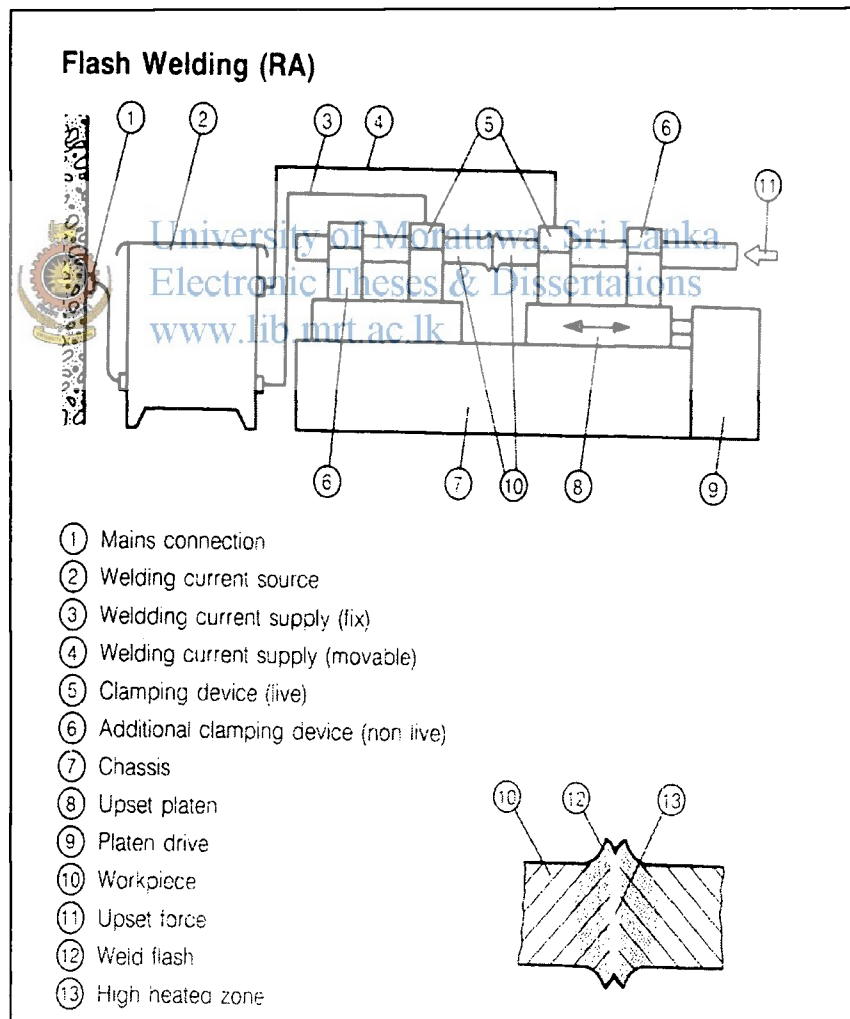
Machine Components of Flash Butt Machine [2]
